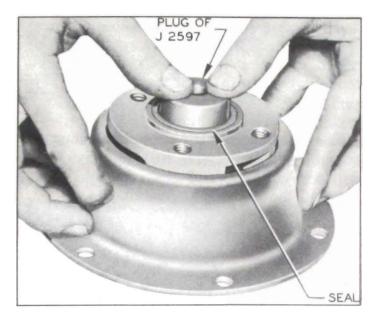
Pushing Installing Tool into Universal Joint Oil Seal
